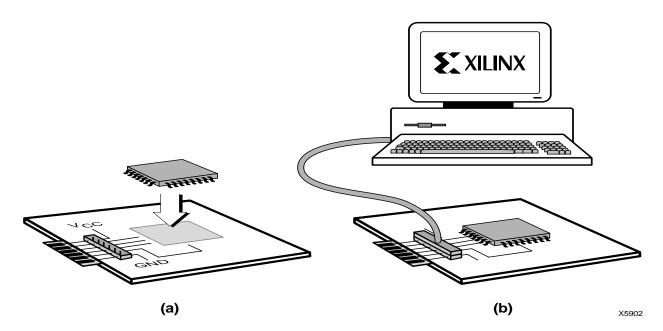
In-System Programming Operation (a) Solder Device to PCB and (b) Program Using Download Cable
